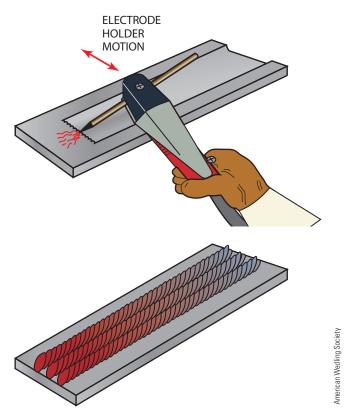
Hardsurfacing weld applied in the carbonarc-cut groove.
